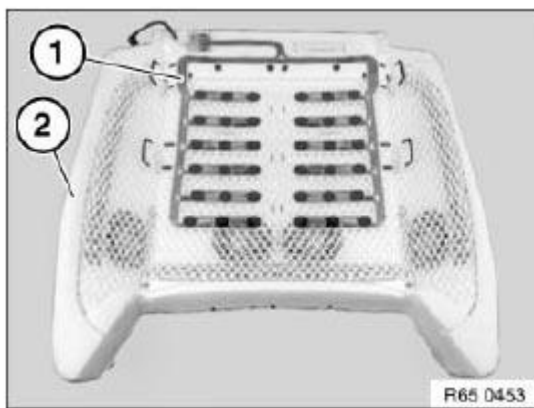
Identifying Sensor Mat For Driver Seat Occupancy Detector And Support (2)
